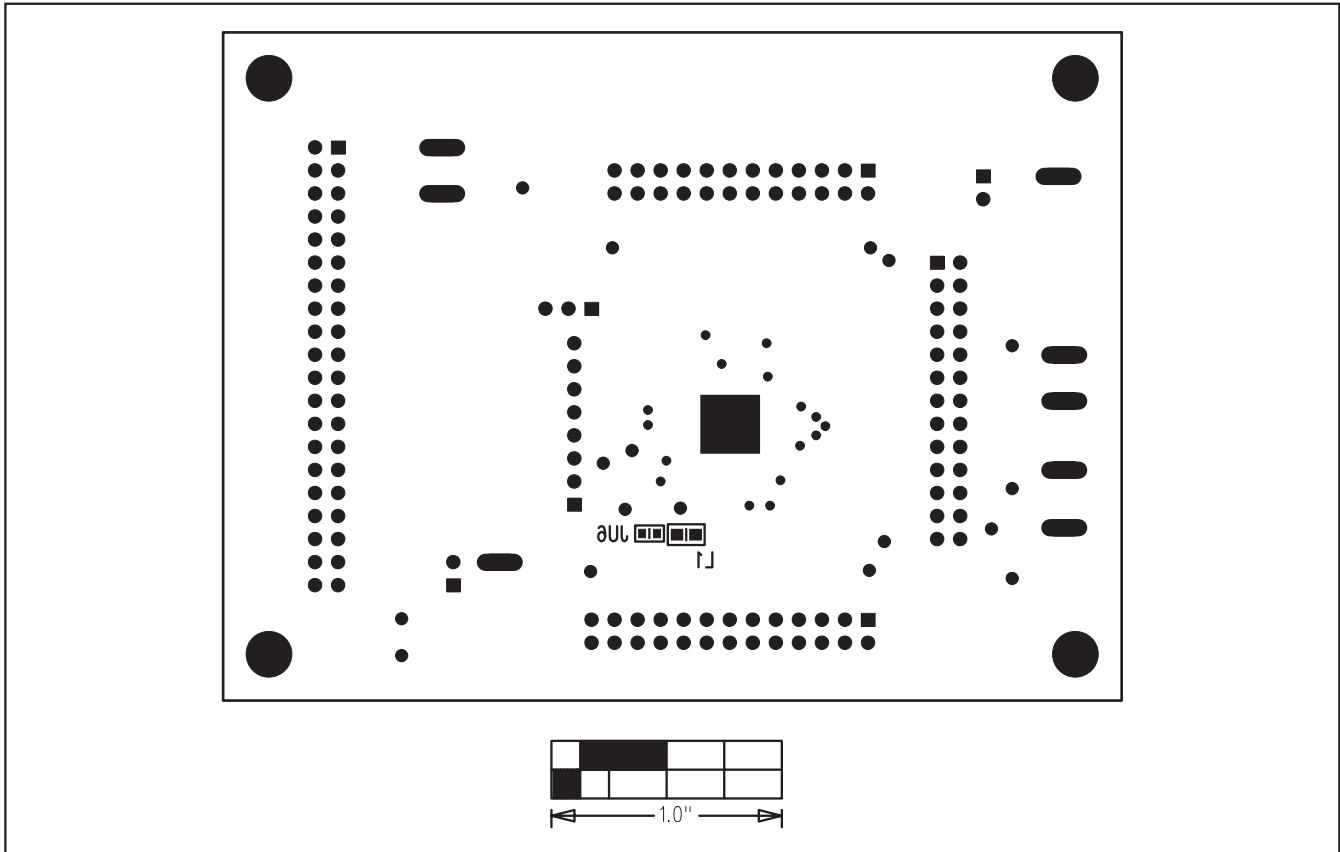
MAX5734 EV Kit Component Placement Guide—Solder Side
